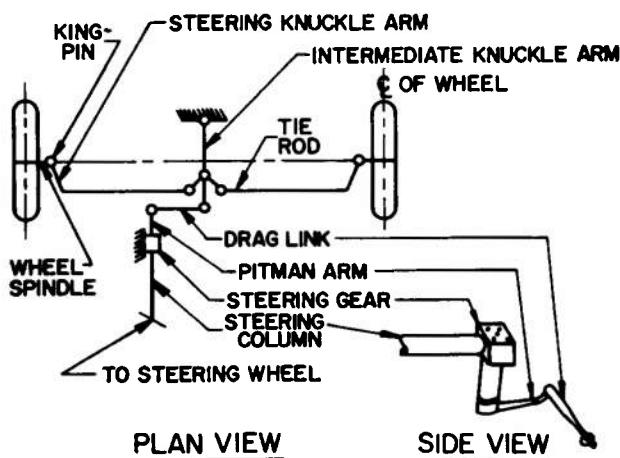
Steering Linkage with Intermediate Knuckle Arm
